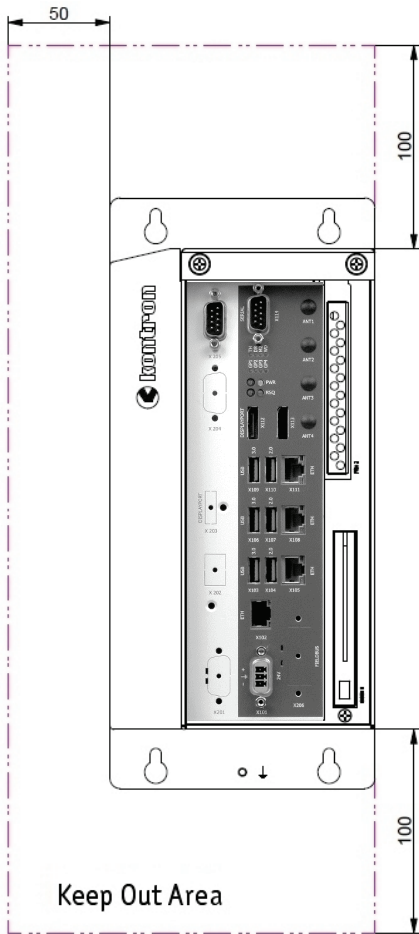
Keep out area for mounting around KBox C-104-TGL-1 (front side view with optional fan tray)
